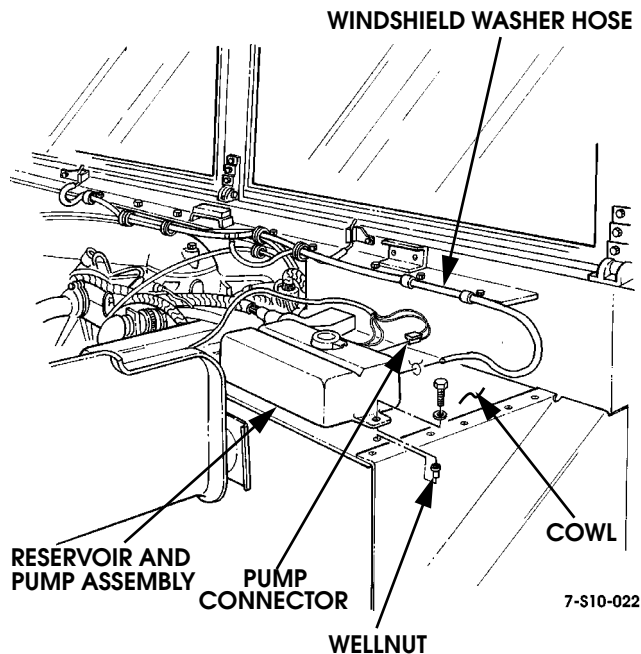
Windshield Washer Fluid Reservoir and Pump Replacement
